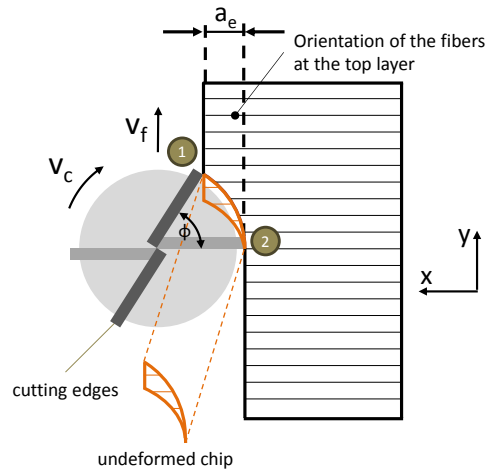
Cutting conditions during milling the edges, 1) describes the entry of the cutting edge, 2) describes the exit of the cutting edge
